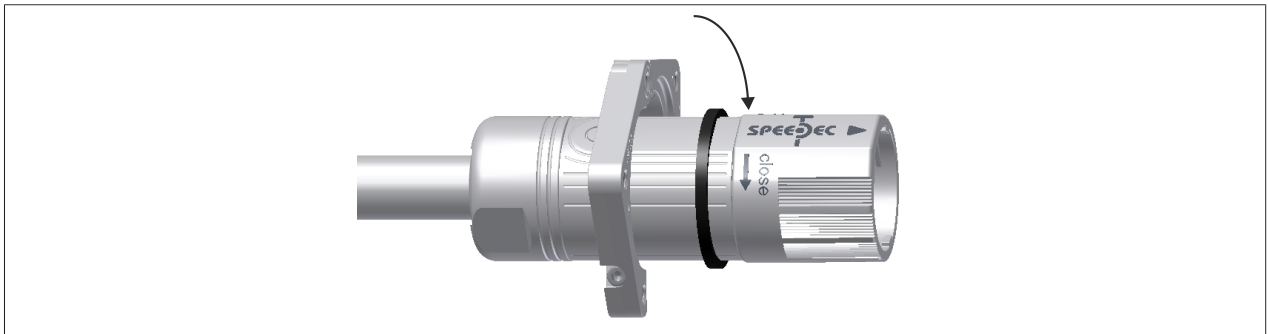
Attaching the metal flange to the connector (rear panel installation)
